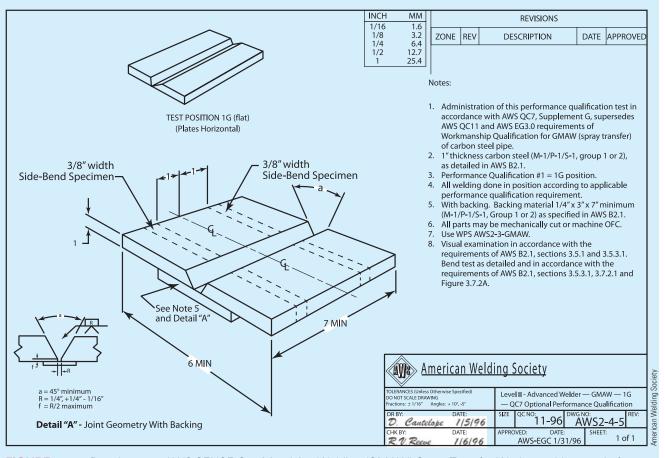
Practice 15-6 AWS SENSE Gas Metal Arc Welding (GMAW) Spray Transfer Workmanship sample for 1-in. (25-mm)-thick steel plate.
